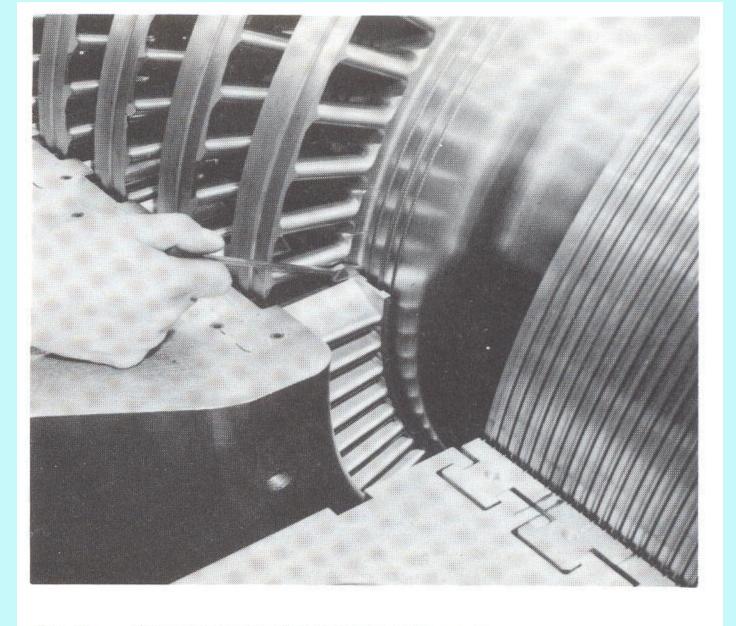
Measuring the Axial Blade Clearance using Block Gauges
